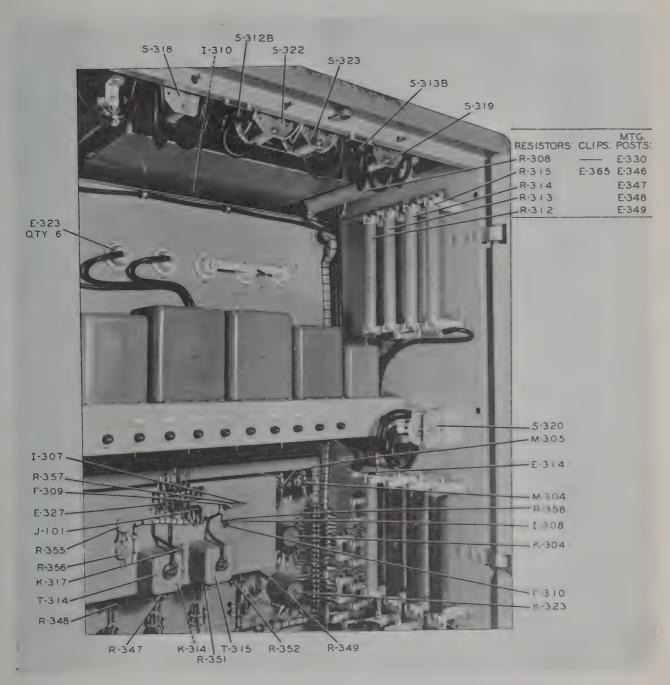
Power Supply Assembly PP-1088/FRT-26, Upper Left-Side Cabinet Wall, Rear View.
